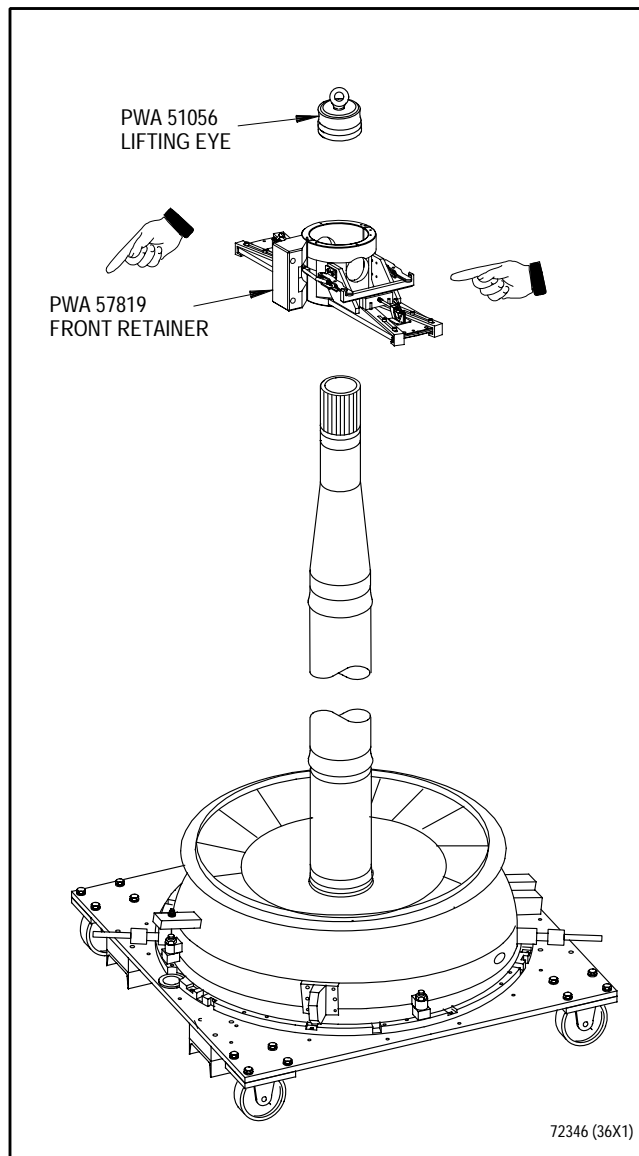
Front Compressor Drive Turbine Rotor and Stator - Installation into PWA 56338 Stand (Sheet 9 of 9)
